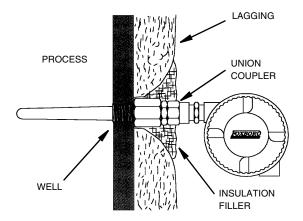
Thermowell Mount (Housing Codes E, F, L, and M)
